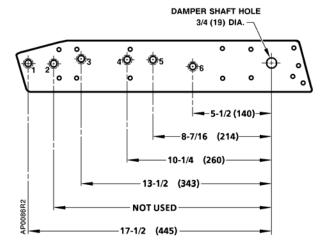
Actuator Mounting Plate 331-623. Dimensions in Inches (Millimeters).
